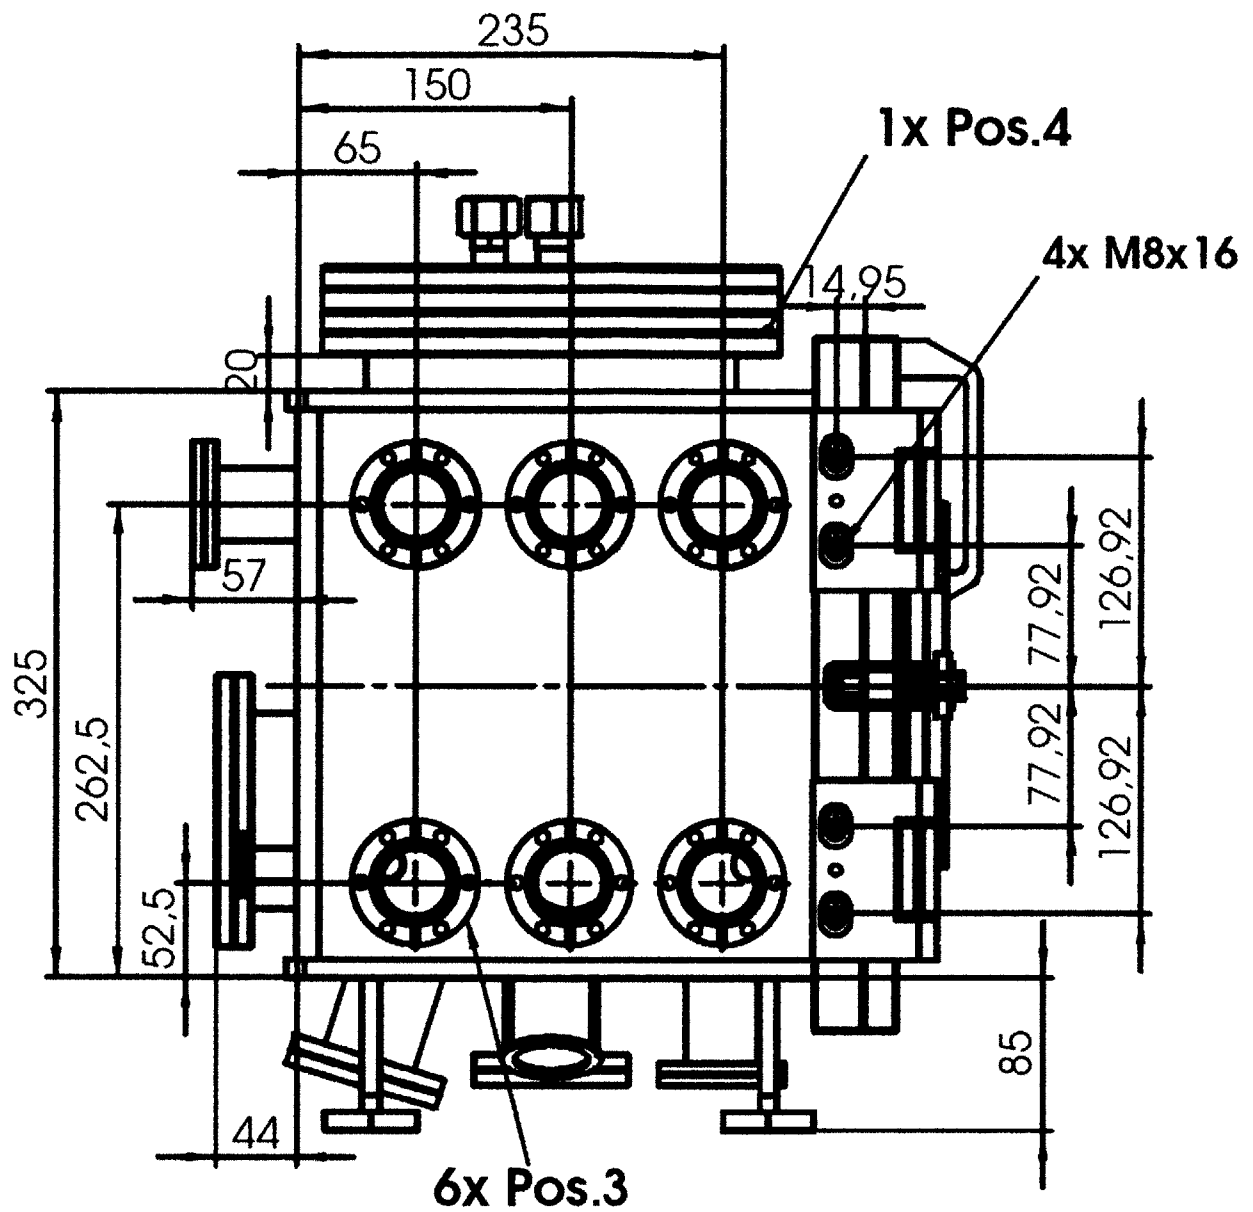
oCVD chamber engineering drawings – close-up view of left side of chamber
